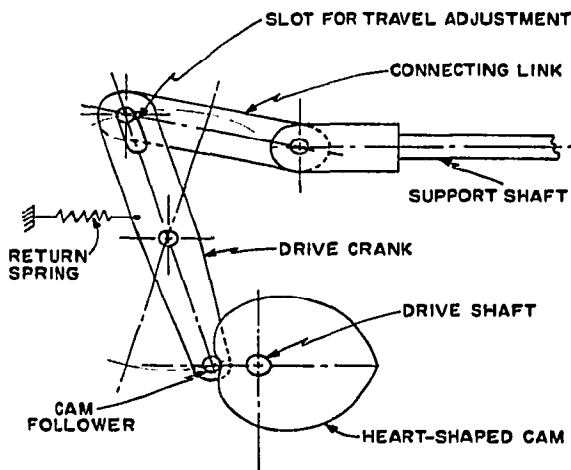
Mechanical drawing of "heart-shaped" cam and linkage.
